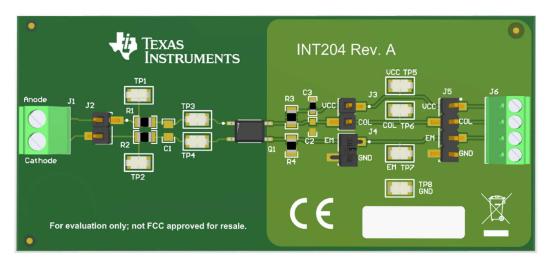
ISOM8110DFGEVM PCB 3D Diagram
